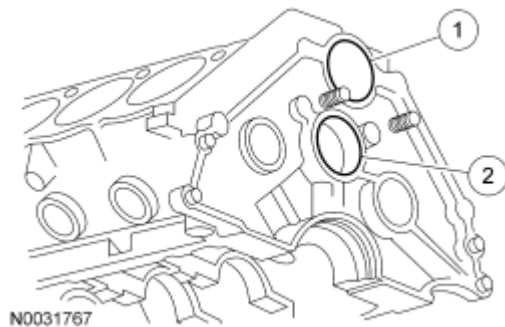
Identifying Engine Dynamic Balance Shaft Bearing Cover & Camshaft Bearing Cover
